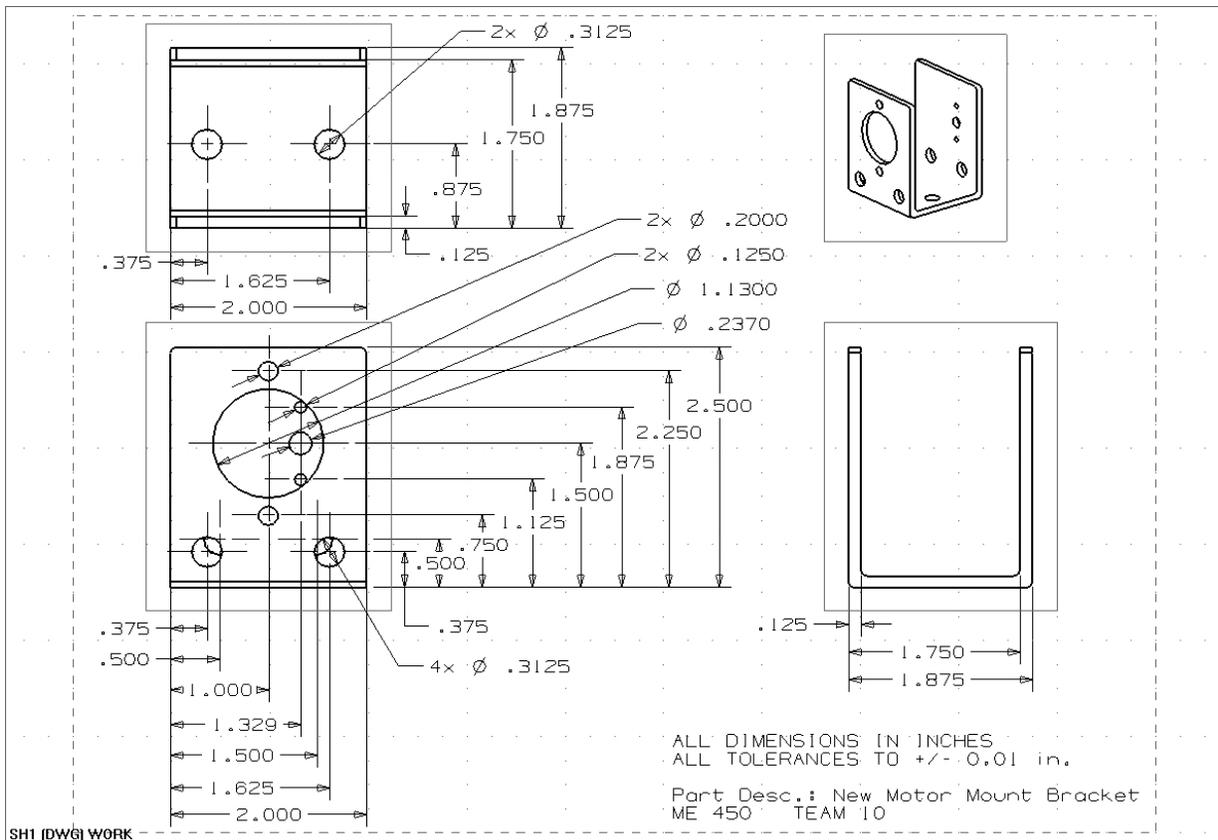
Detailed dimensioned drawings for the new motor/encoder mount bracket.
